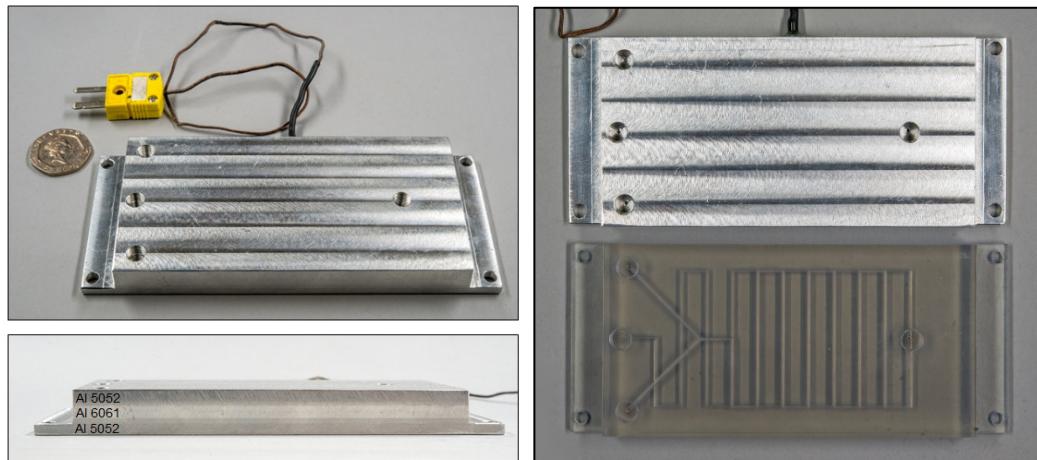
Images of aluminium 3D-printed reactor and its SLA formed prototype
